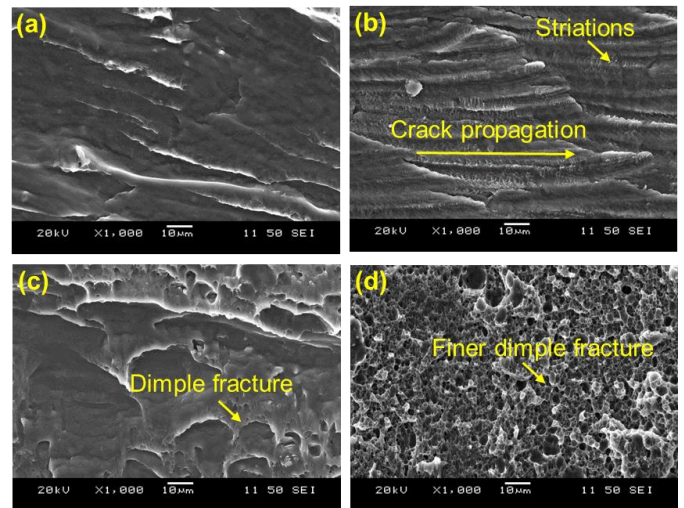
Fatigue fracture surface of (a) AA5182 and (b) AA7075 welded joints; dimpled fast-fracture region for (c) AA5182 and (d) AA7075, where all the samples were welded at 4000 J and failed at $P_{max} = 5$ kN.
